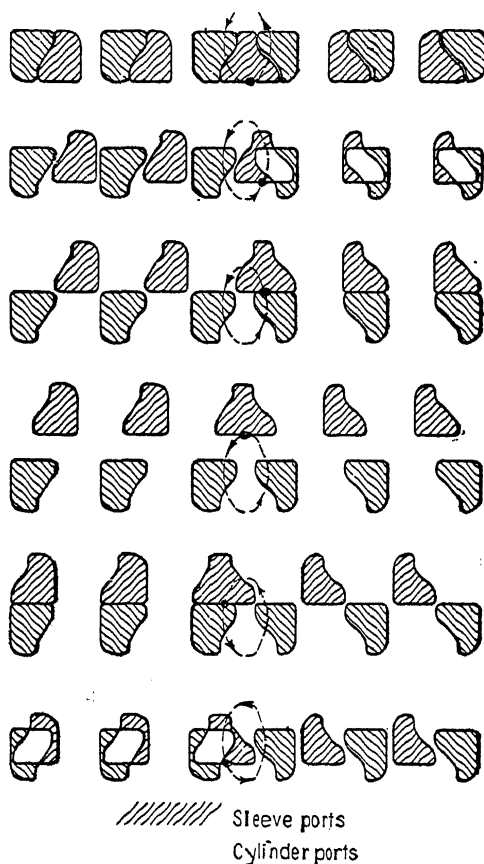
Sequence of valve port openings and closing in five-port engine.
